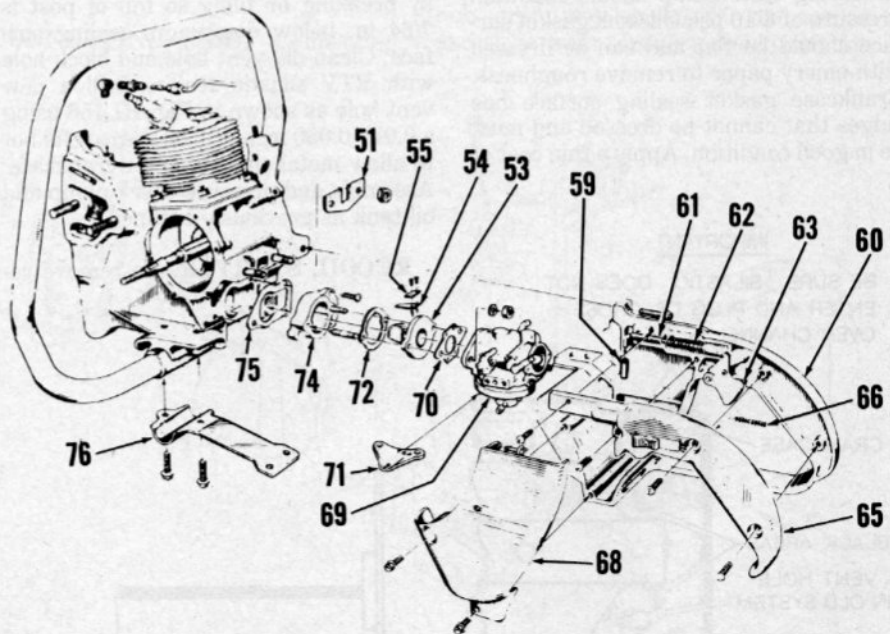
Exploded view showing typical throttle controls and carburetor mounting.
